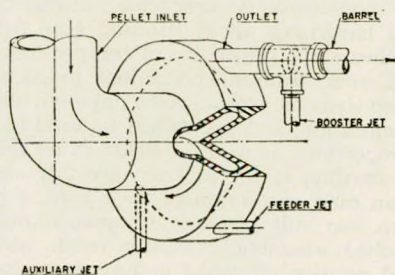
Diagrammatic arrangement of pellet feeder unit of latest design
